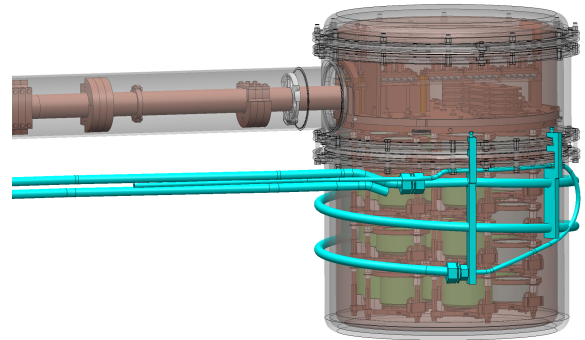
Close-up of the drawing in Fig.1 which shows the relative location of detector array and calibration module.
